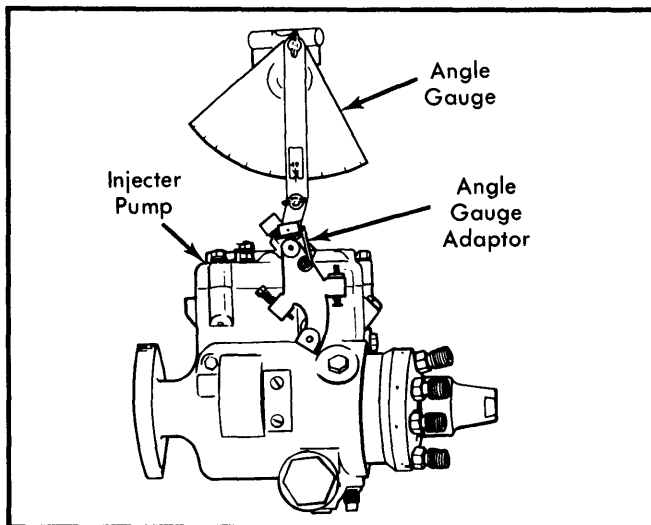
Transmission Vacuum Valve Adjustment Showing Carburetor Choke Angle Gauge Installed
